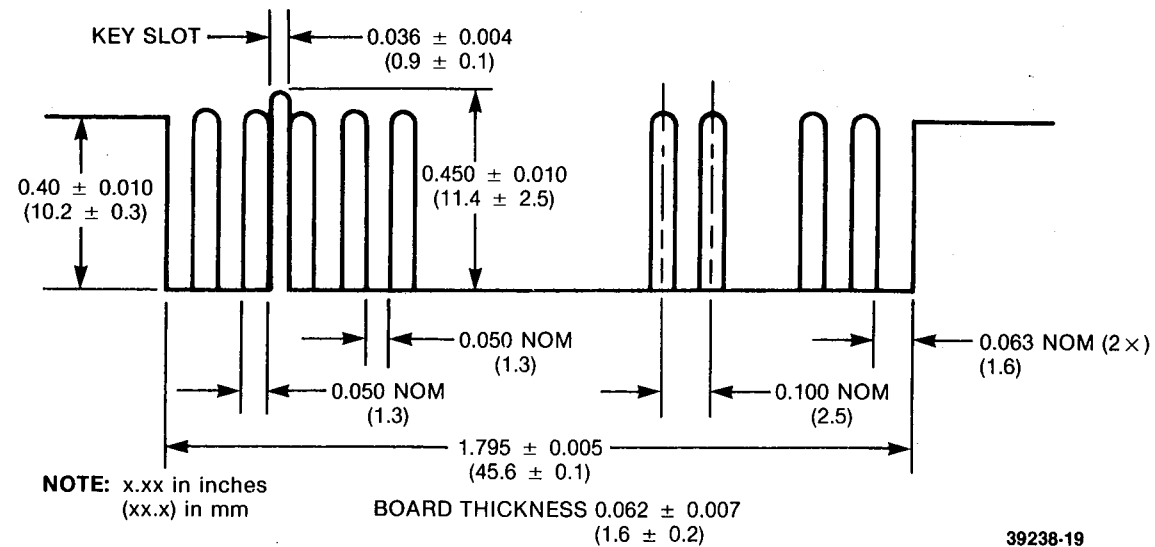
J1 CONNECTOR DIMENSIONS
